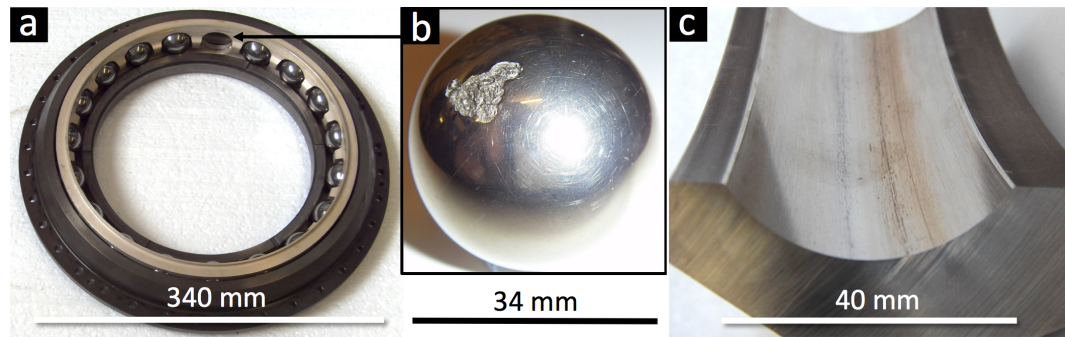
a). Rolls-Royce Trent engine location bearing with inner raceway removed to reveal the rolling elements held within the cage. b). M50 bearing ball removed after 30,000h service displaying a fatigue spall. c) Cross-sectioned M50NiL outer raceway after 30,000h service displaying tracks of discolouration at positions which indicate thrust loading.
